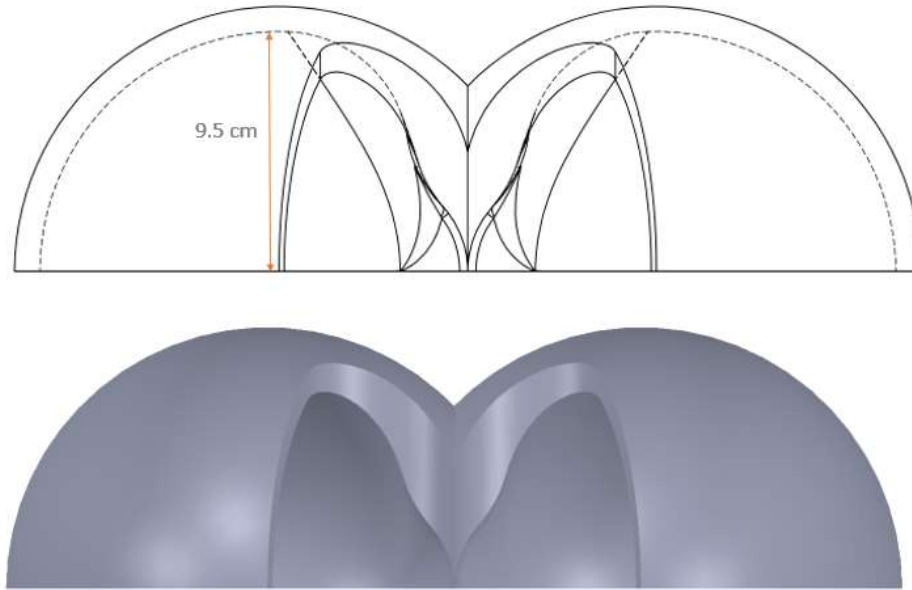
Pelton bucket top view drawing (top) and rendered (bottom).
